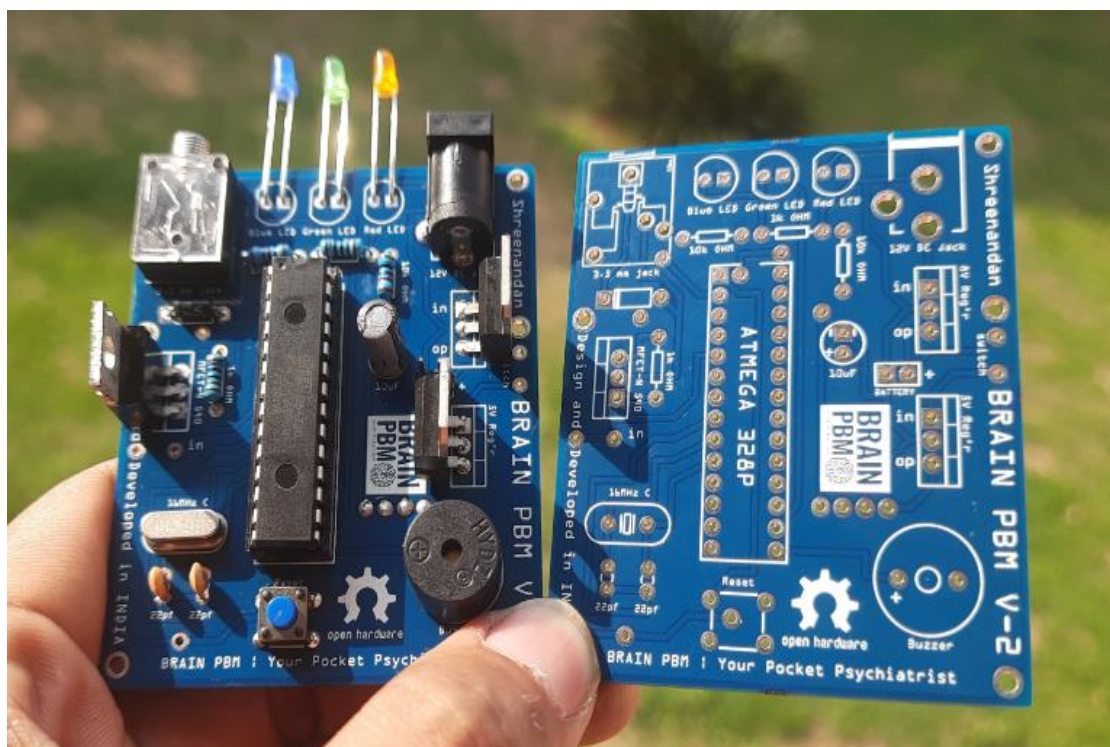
custom PCB, footprints of components (right), components after getting mounted on the PCB (left)
